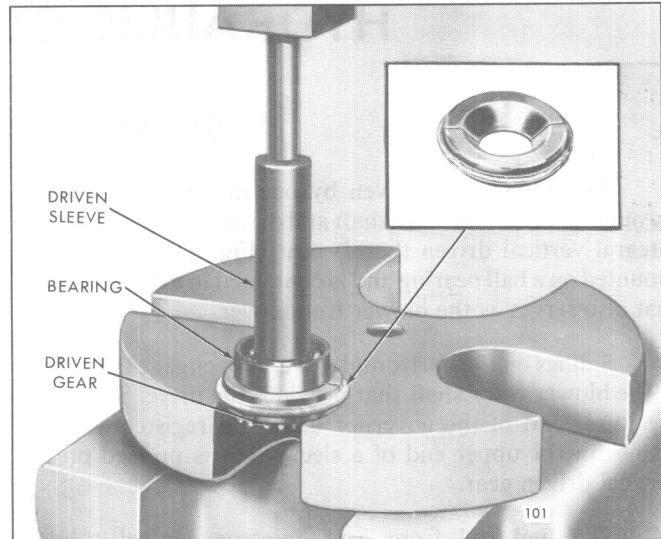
Removing Driven Sleeve and Bearing from Driven Gear
